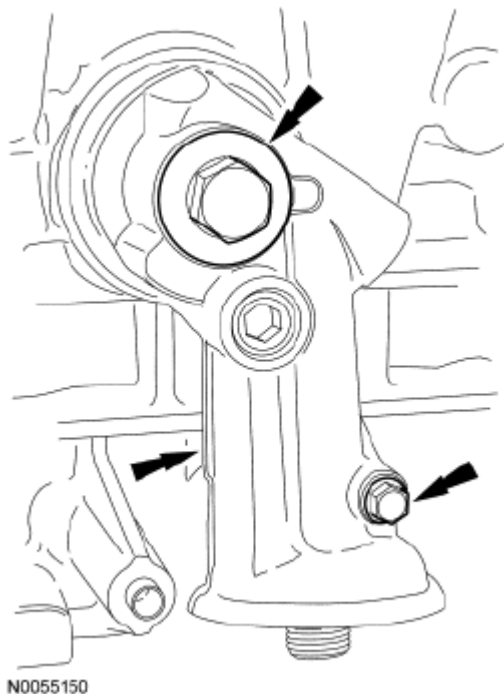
Locating Oil Filter Adapter, O-Ring Seal & Bolts
